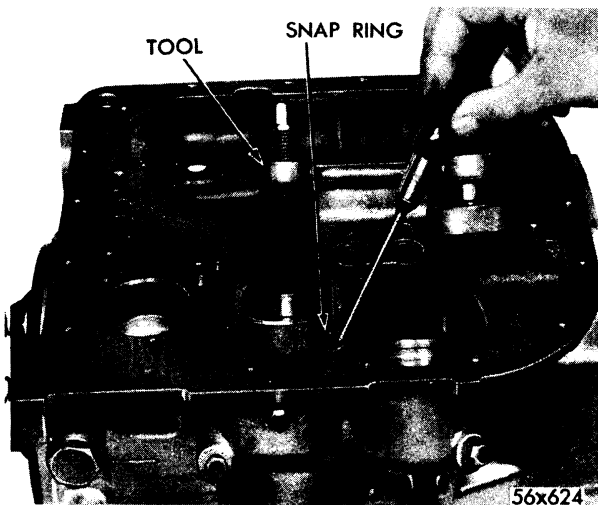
Removal and Installation of Kickdown Piston Rod Guide Snap Ring
